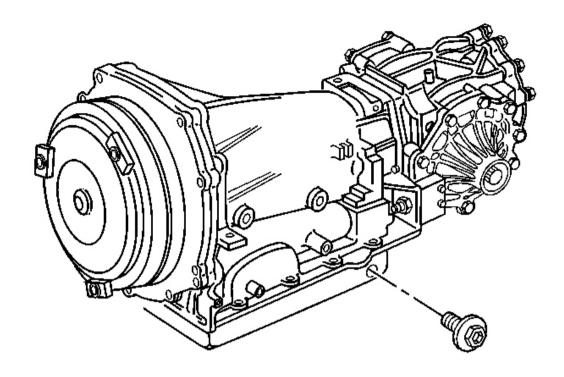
Transmission Check/Fill Plug Courtesy of GENERAL MOTORS CORP.
